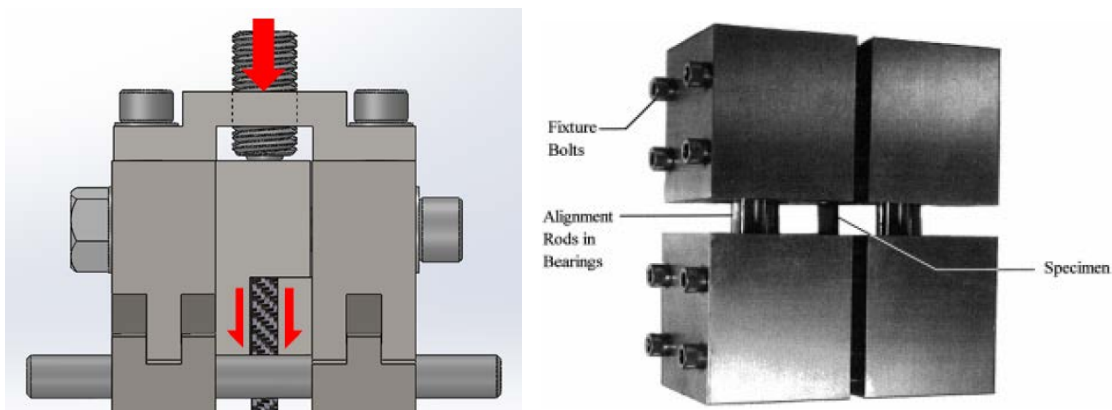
In plane/shear loading of the picture frame fixture and Combined Loading Compression (CLC, ASTM D6641) fixture assembly.
